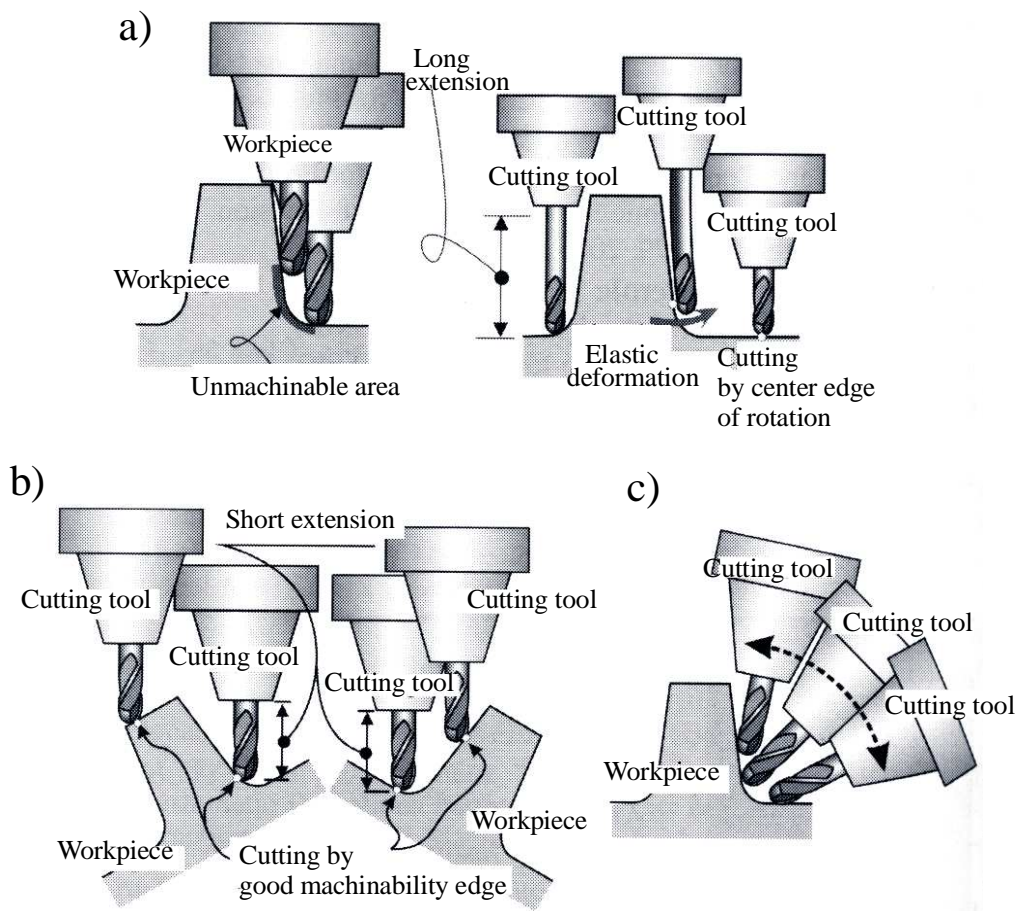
Relationship between: a) 3-axis machining, b) tilted tool axis machining c) 5-axis machining [22]
